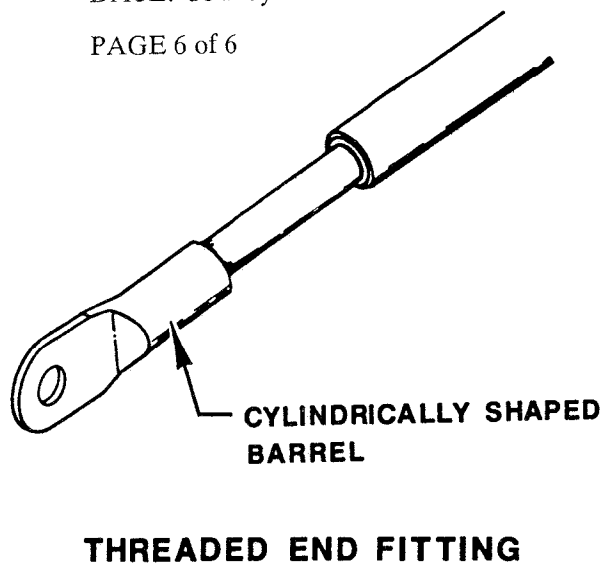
IDENTIFICATION OF THROTTLE CABLE ASSEMBLY
